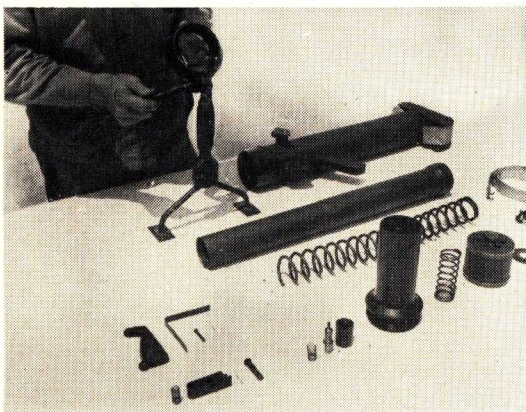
Step 13—Remove the monopod hinge collar from the recoil spring housing. The monopod is removed from the collar by unscrewing the adjusting clamp.
